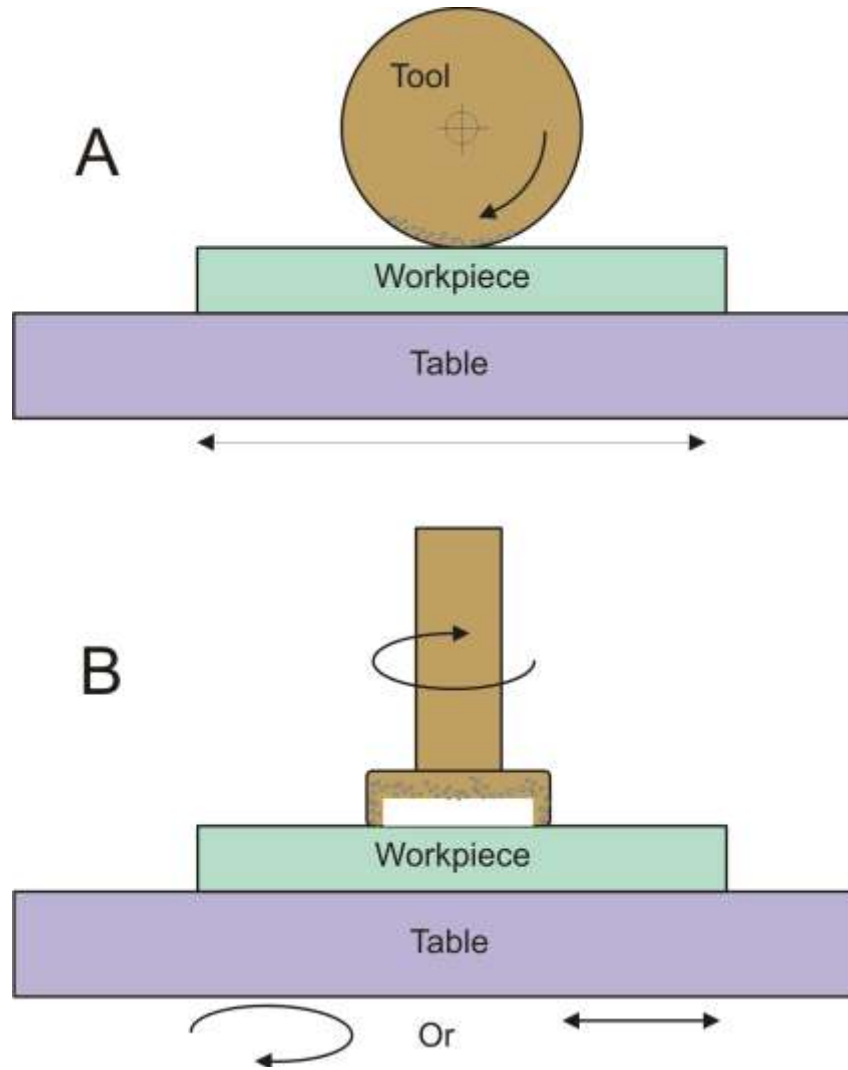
(A) Horizontal spindle grinding and (B) vertical spindle grinding.
